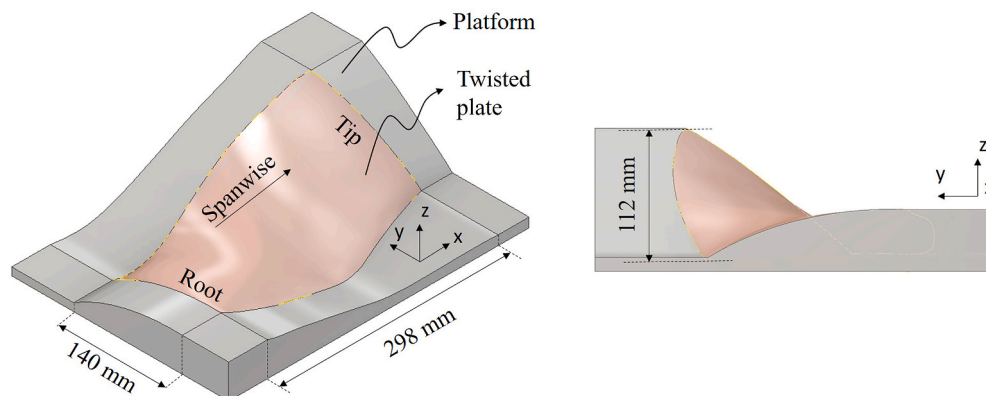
Designed mould with basic dimensions and the twisted plate part is highlighted in the centre of the mould.
